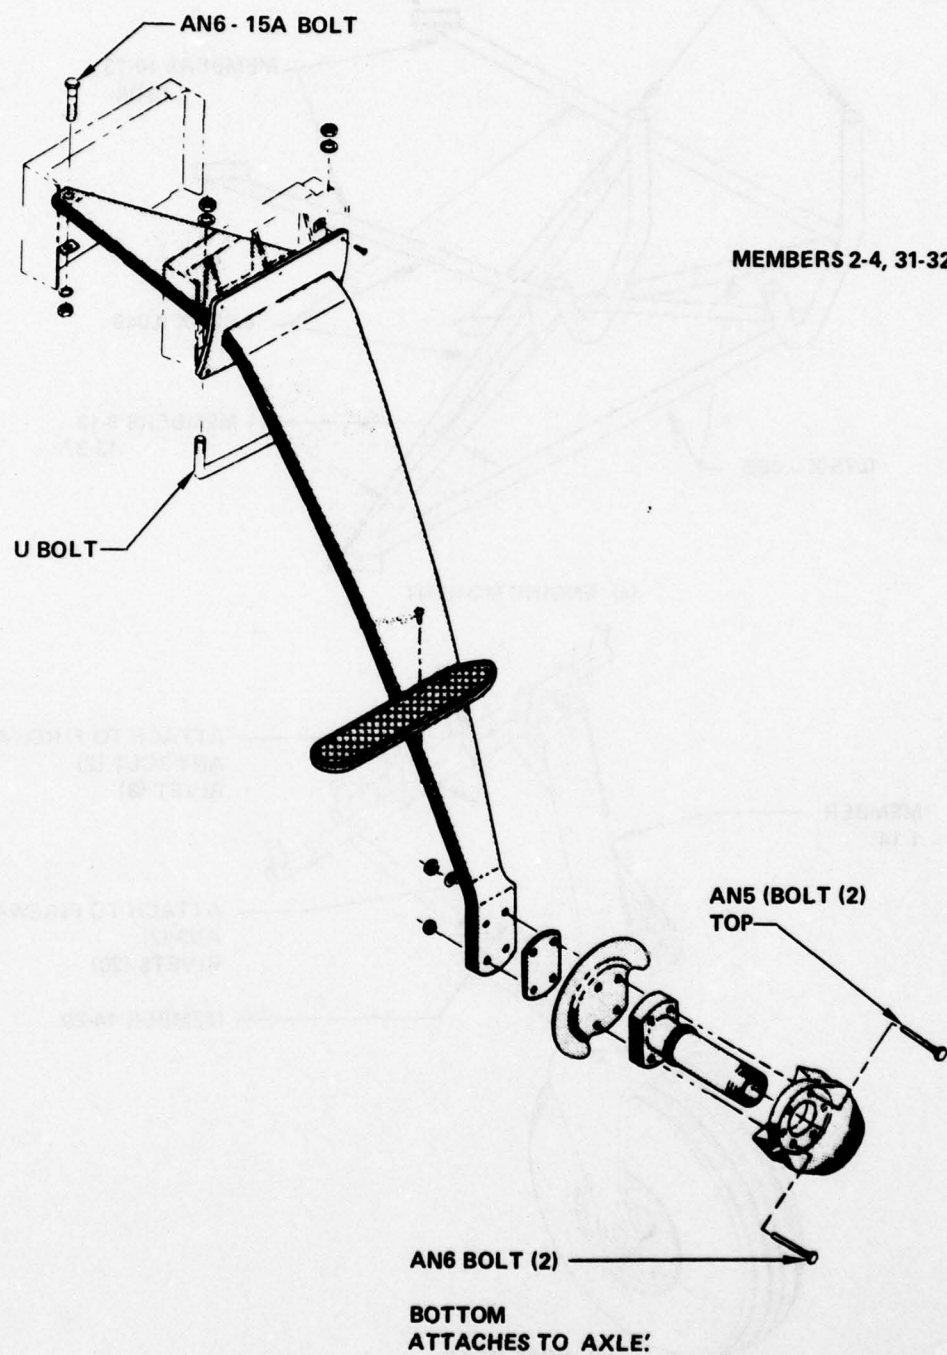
Main Landing Gear Cantilever Spring Cross Section
